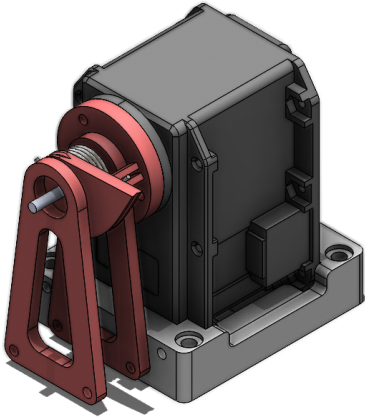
Theoretical implementation of mechanism for gripper prototype, SolidWorks
